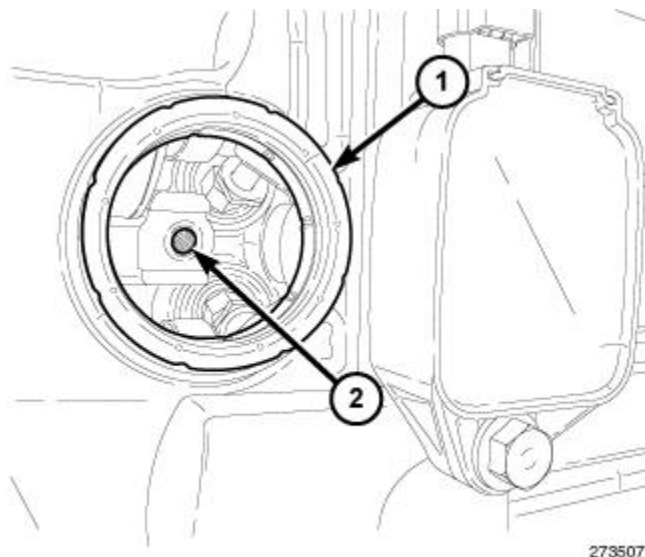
CMP Sensor Seal & Mounting Bolt Hole
